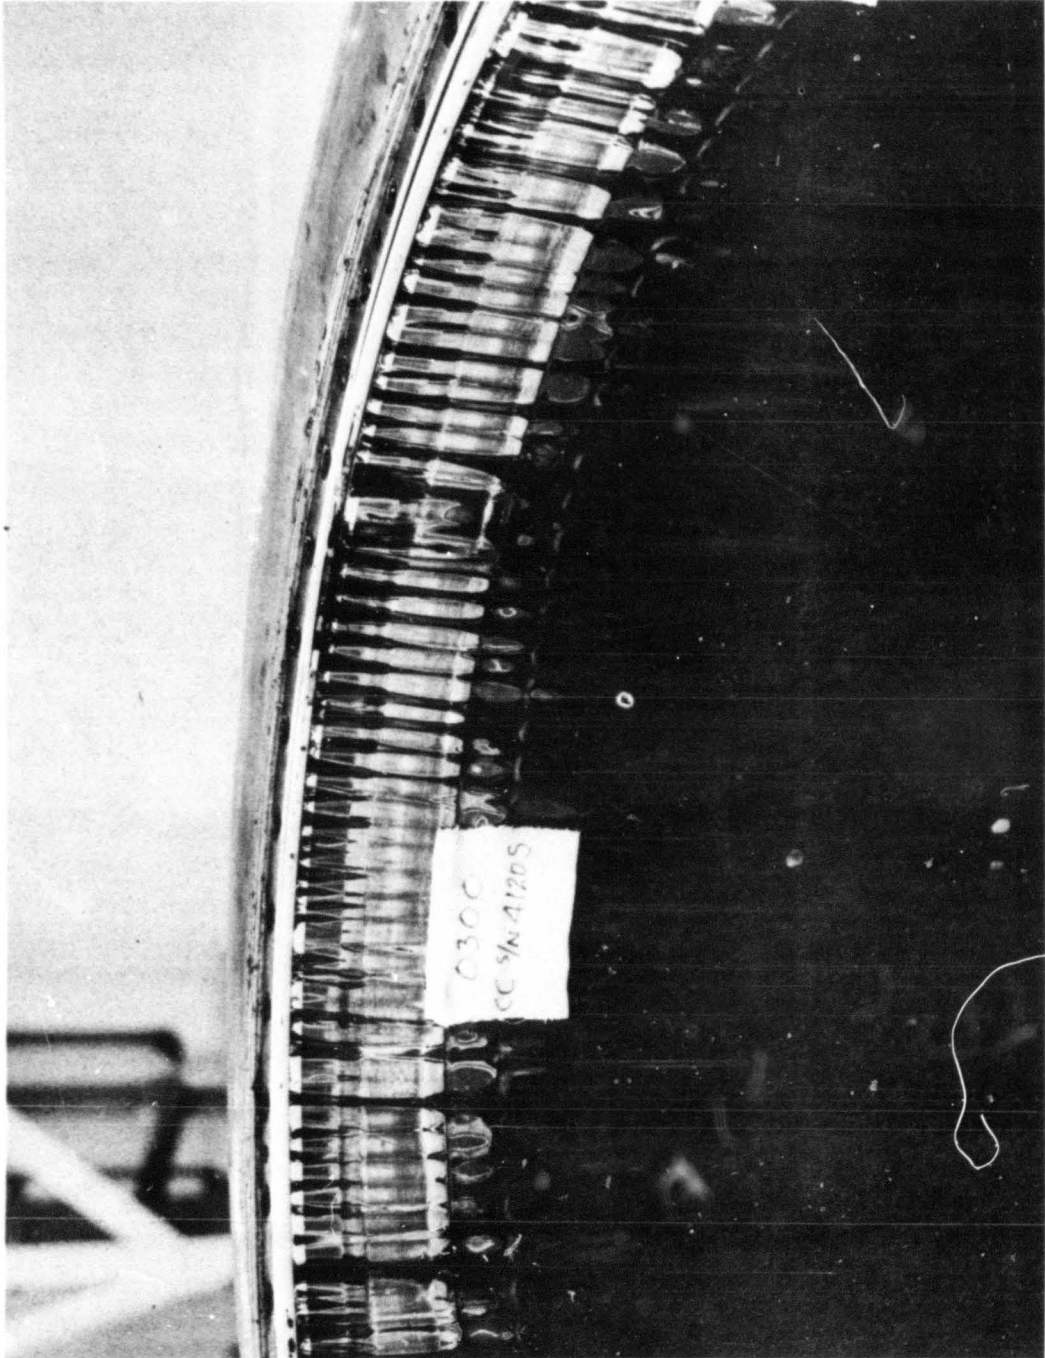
Forward Flange -- Chamber S/N 003 after Test No. 3051-D01-1A-008
